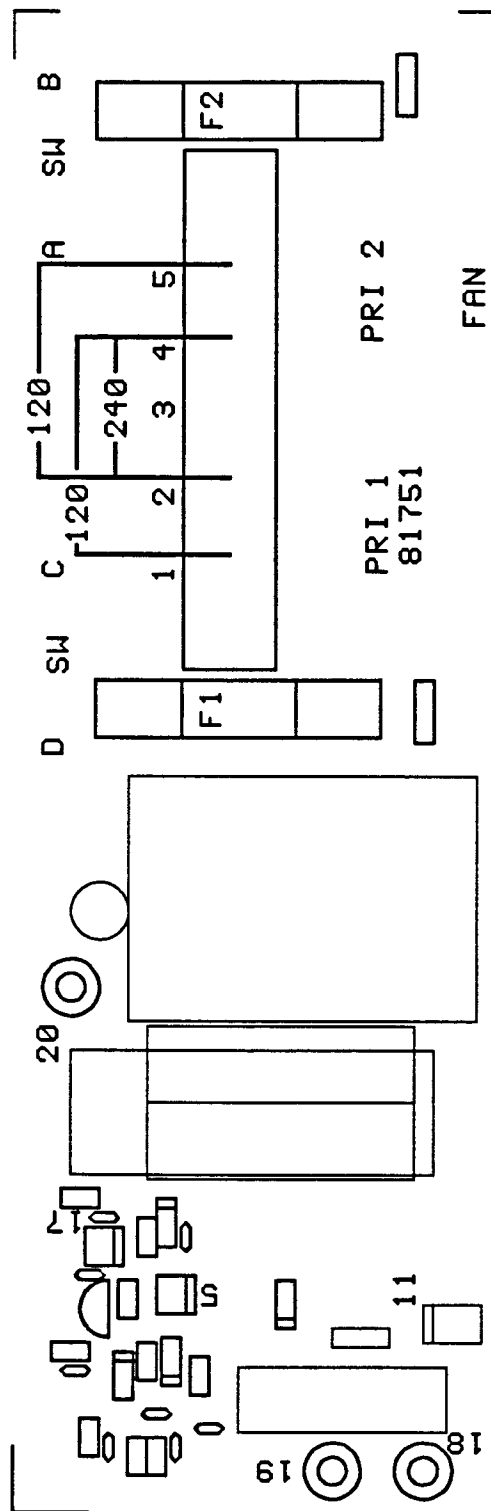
4 INPUT BOARD COMPONENT LAYOUT (81751)
